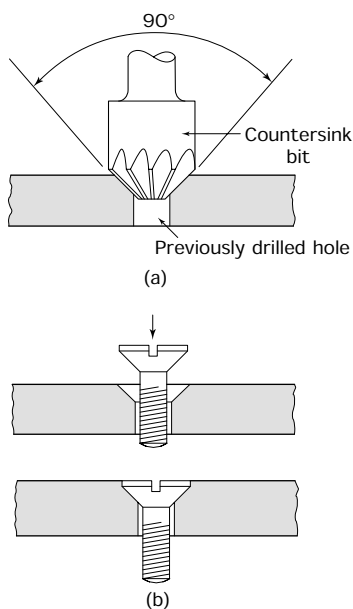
Countersinking: (a) cutting a countersink; (b) the countersink allows head of the screw to be recessed
